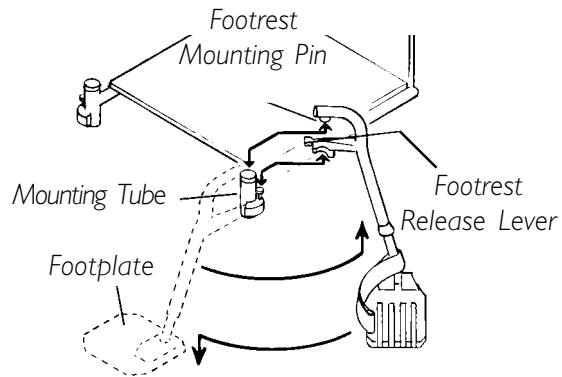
INSTALLING/REMOVING FOOTRESTS - 60°, 70°, 70° TAPER
